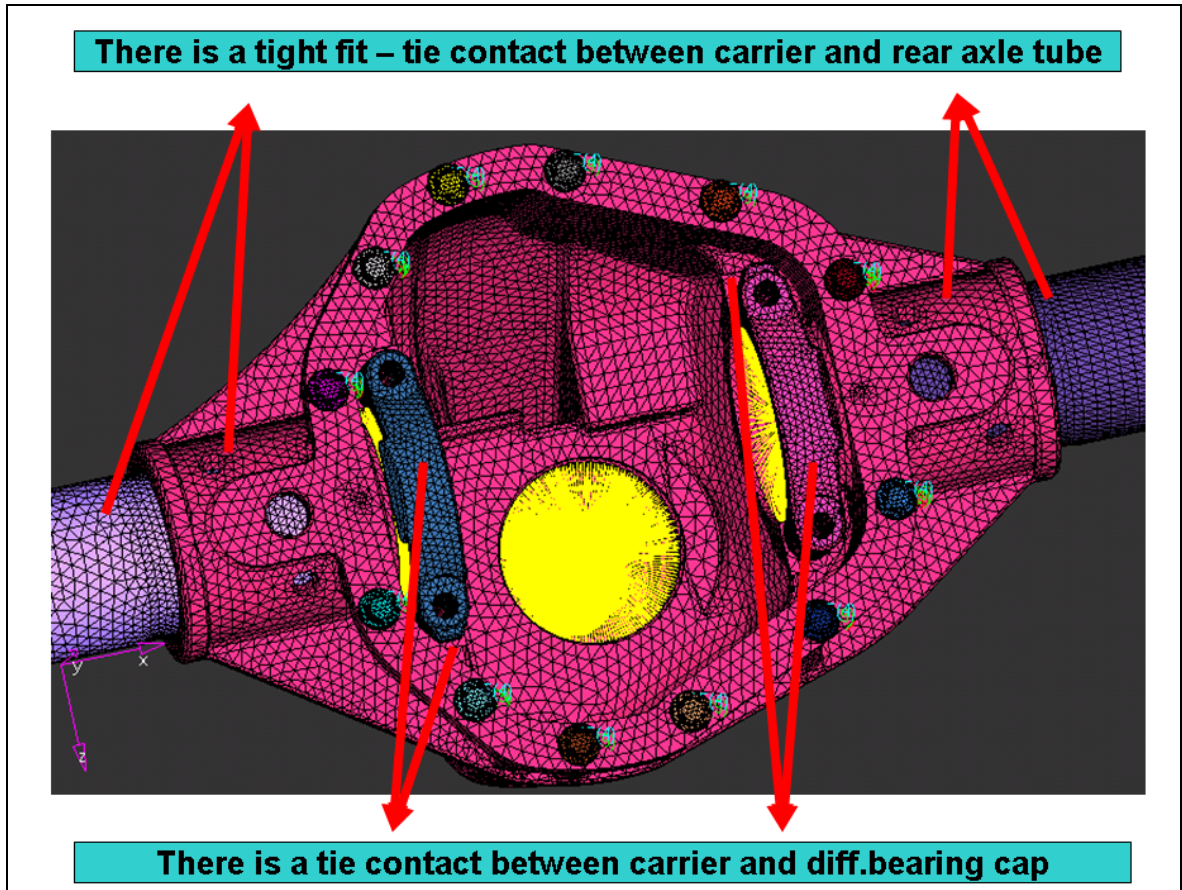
FE model of the carrier and rear axle tube & carrier and differential bearing cap
